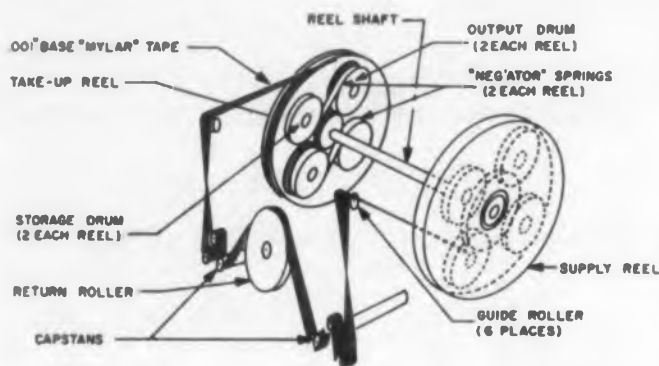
Spring-driven reeling system in Courier recorder, (Fig. 2), cuts power requirements, eliminates take-up motors, brakes, clutches, and switches. Hunter Spring Co.'s "Neg'ator" springs apply reverse torque through a common shaft to the reels.
